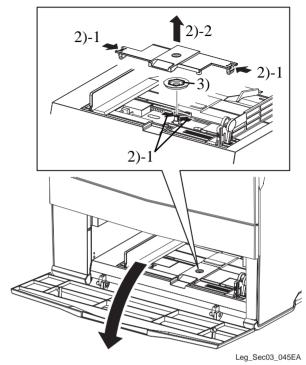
Removal of GUIDE SIDE L and GUIDE ASSY SIDE R (1)
